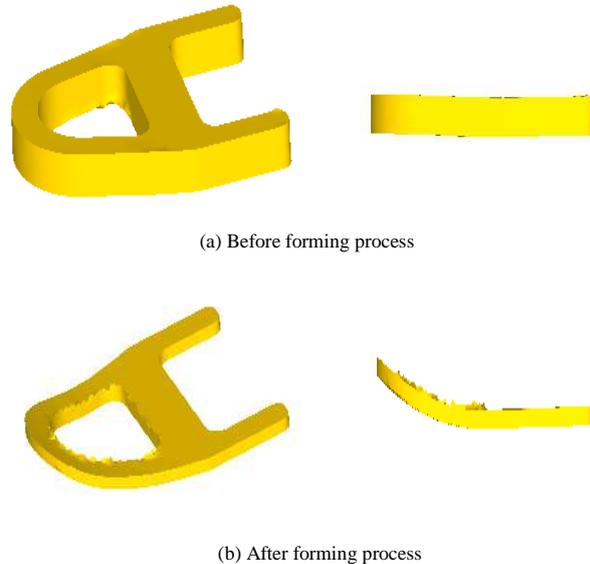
Mesh models of the aluminum alloy billet and die before and after the forging process
